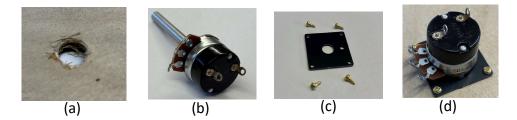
Installation of potentiometer mounting plates. (a) shows the shaft hole in the radio cabinet for potentiometer (b). (c) shows the mounting plate and screws. (d) shows the potentiometer secured to the back of the cabinet using the mounting plate.
